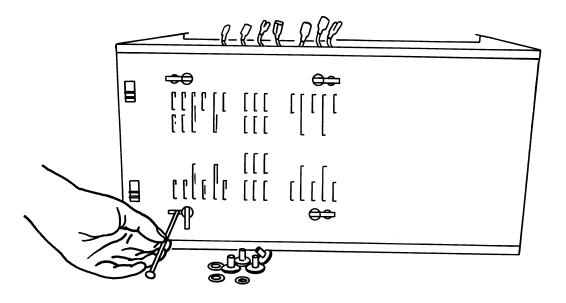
REMOVING HEX HEAD NUTS OF THROUGH BOLTS.
